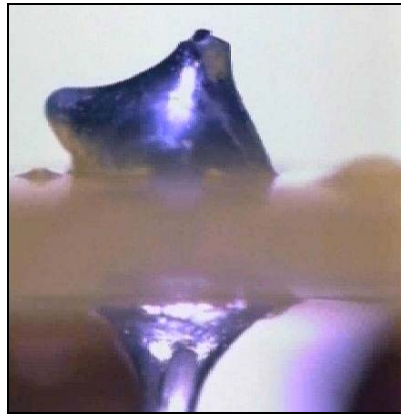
Example of a persistent effect of soldering iron removal observed on a few joints during this experiment.
